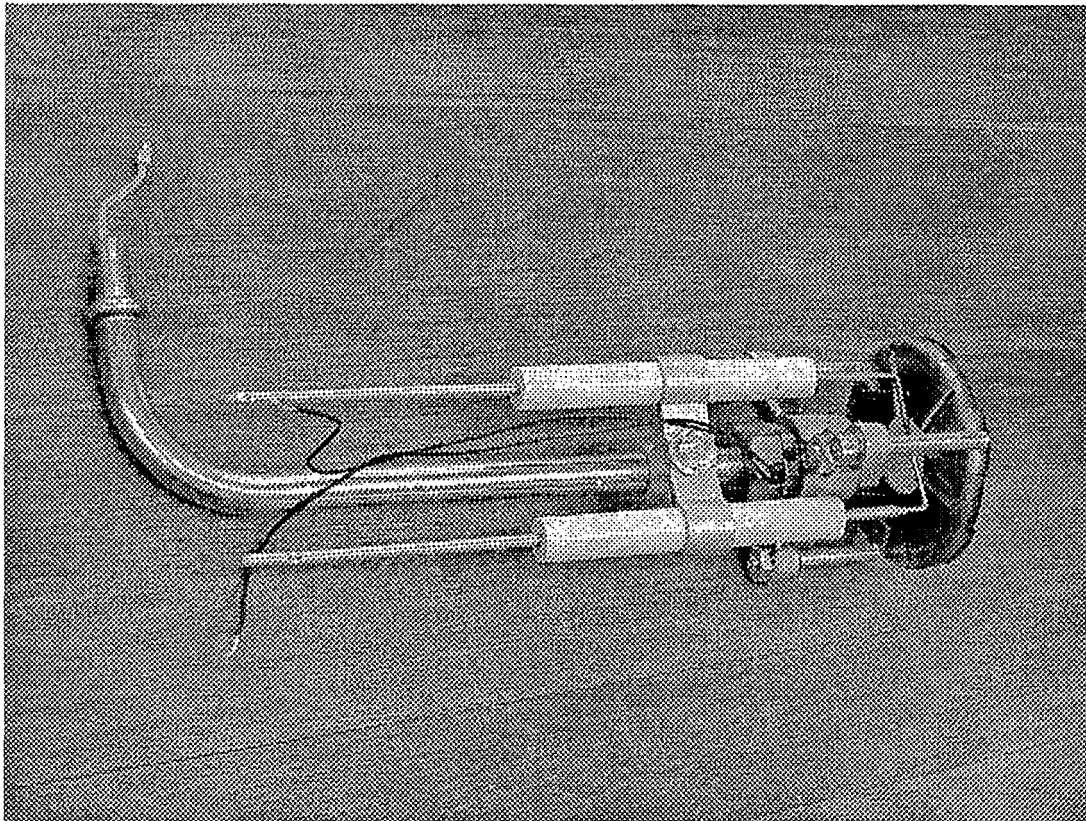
Valve-in-Nozzle in Fuel Tube of Burner
